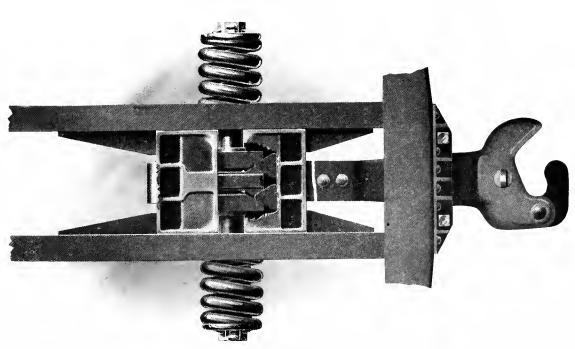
General Design of Application of Cardwell Friction Draft Gear, Type G, Class 11. Union Draft Gear Company.
